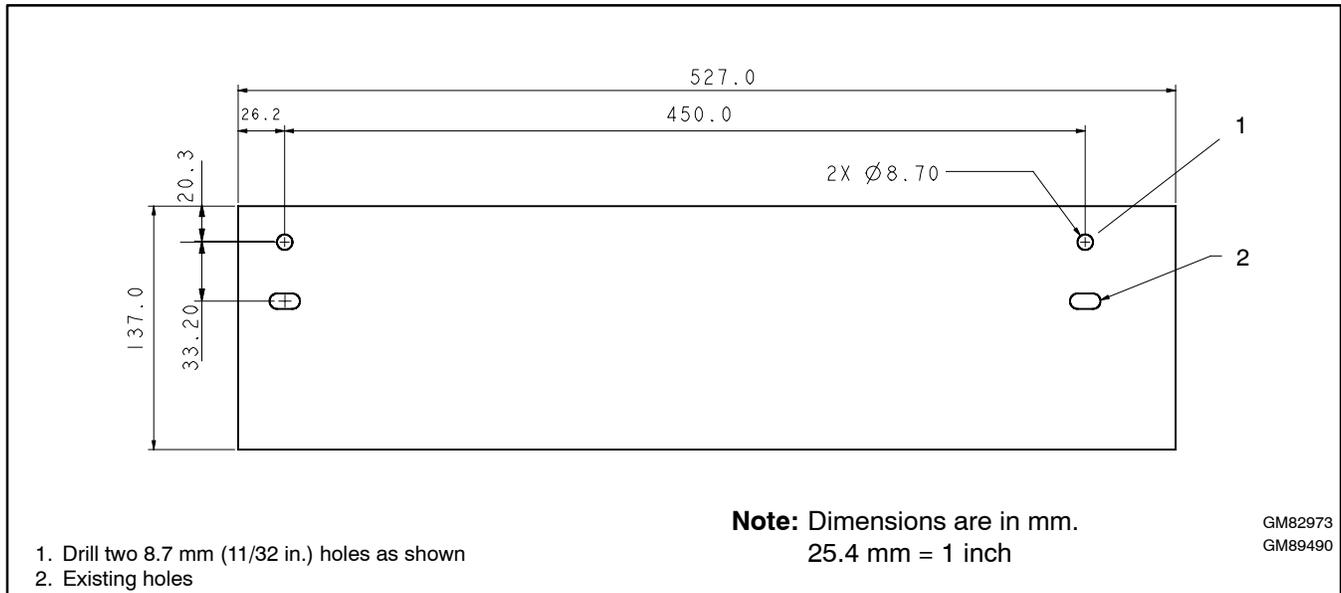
New Mounting Holes, Upper Mounting Bracket GM82973
